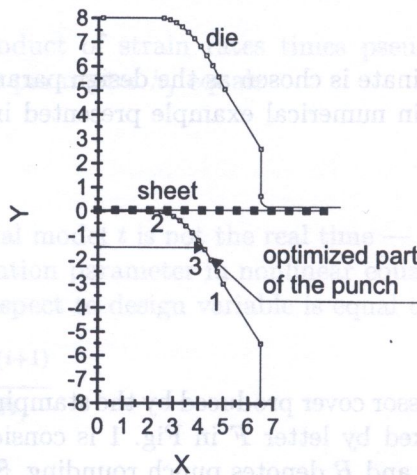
Initial tools shape. Optimized part of the punch is between points 1 and 2
